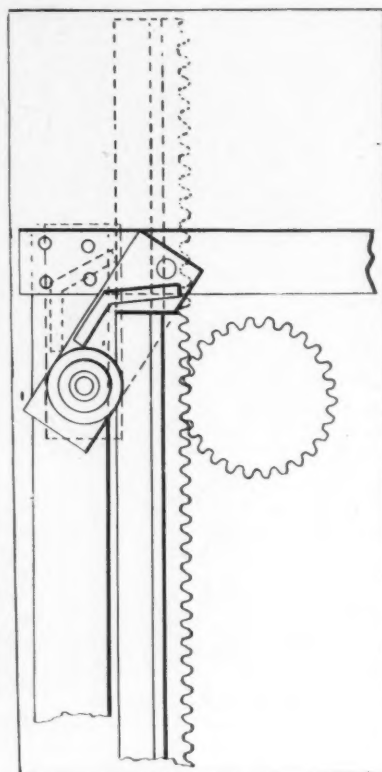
Side elevation of flat-iron frame which supports roller and locking device and locking pin. Dotted lines indicate toothed rack in operation and lock unlocked.
